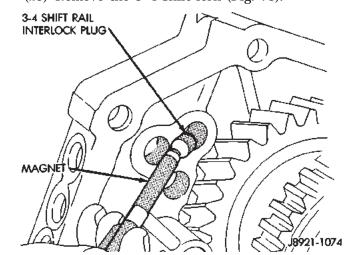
Remove 3-4 Shift Rail Interlock Plug
